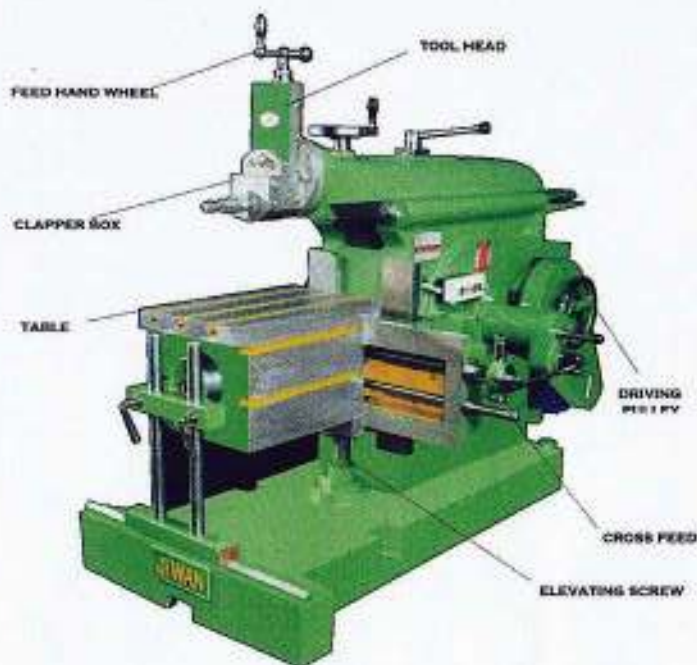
Shaper Machine (Image Courtesy: mech4study.com)
